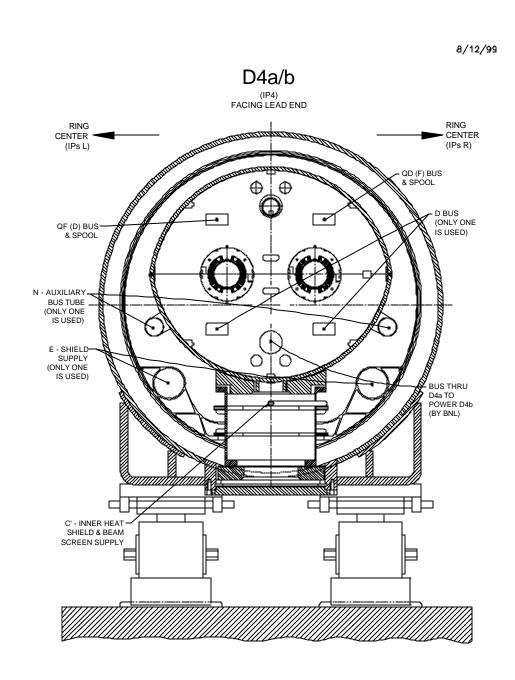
Sectional view of the LBRA/LBRB (D4a/D4b) cryo-assembly
